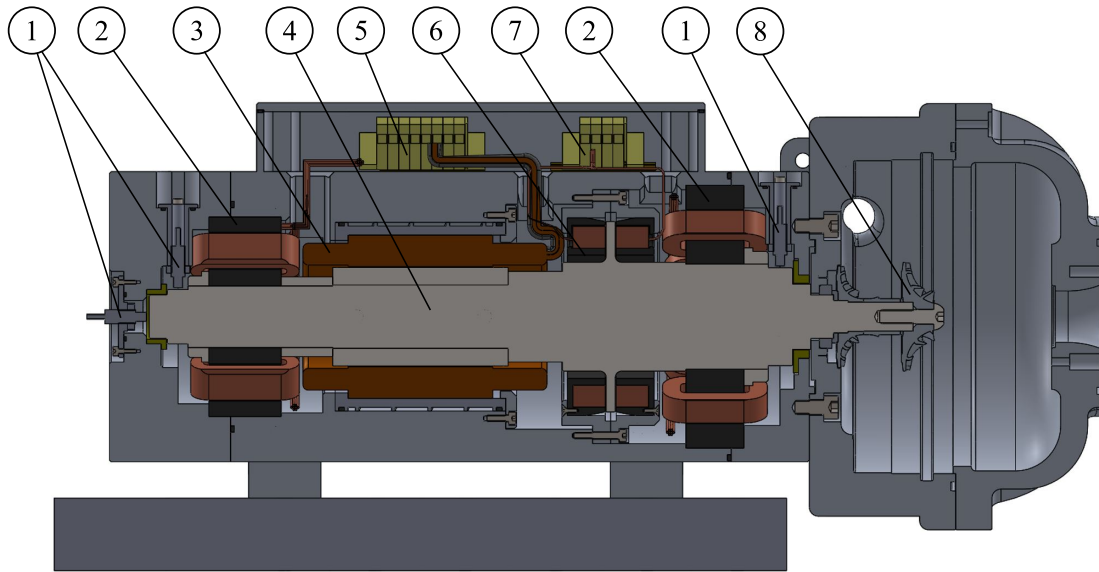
Turbo-compressor on AMBs. 1) Displacement sensors. 2) Radial magnetic bearings. 3) Electric motor. 4) Rotor. 5) Strip connector for the AMBs. 6) Thrust magnetic bearings 7) Motor strip connector. 8) Impeller.
